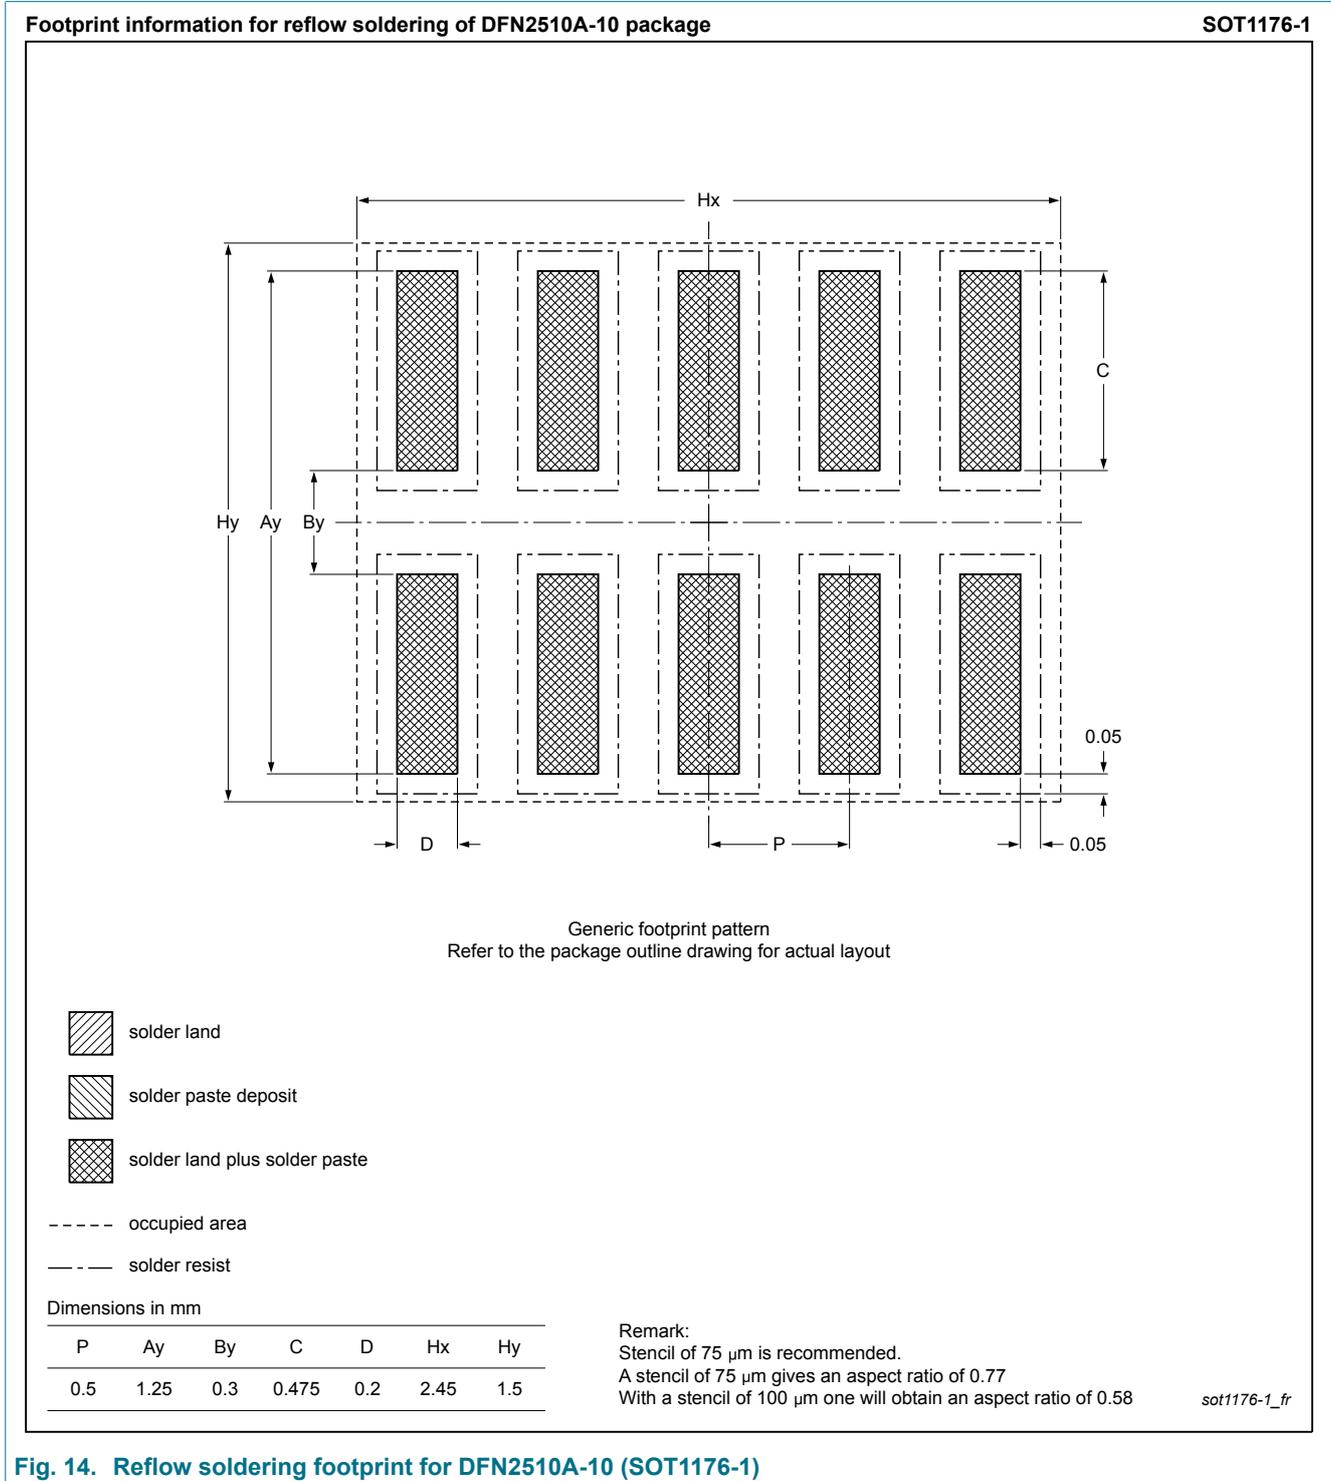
Reflow soldering footprint for DFN2510A-10 (SOT1176-1)
